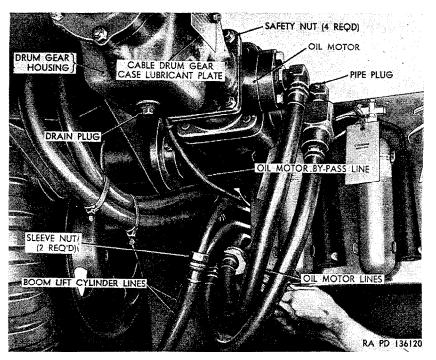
Disconnecting boom hoist hydraulic oil motor lines M62.
